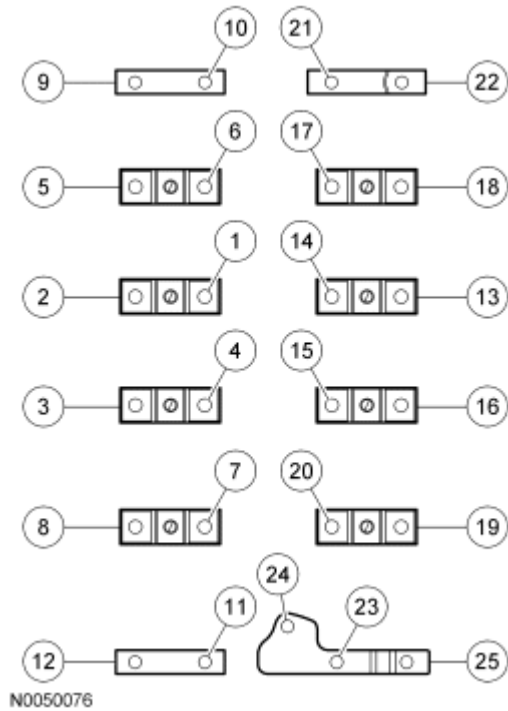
Removing Camshaft Bearing Cap Bolts In Sequence
